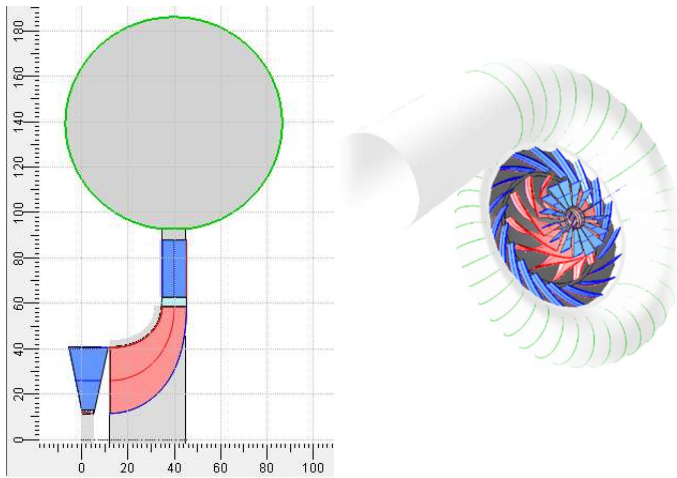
2D AND 3D GEOMETRY VIEW OF COMPRESSOR 1
